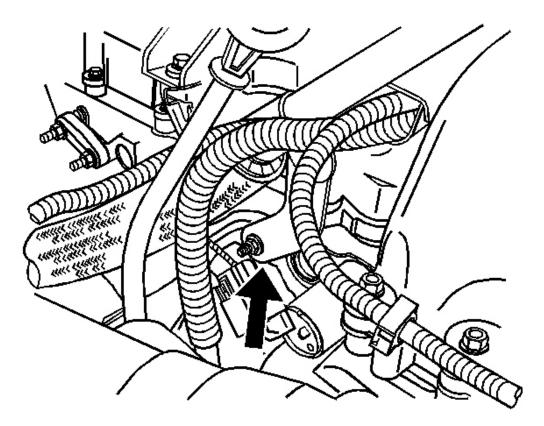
View Of Oil Level Indicator Tube Bracket Nut Courtesy of GENERAL MOTORS CORP.
